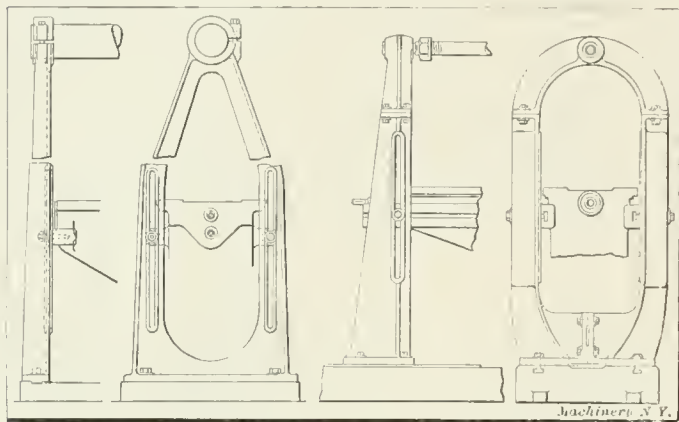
Brace uniting Base, Knee and Overhanging Arm. Fig. 25. Loop Form of Bracing uniting Base, Knee and Work-arbor
